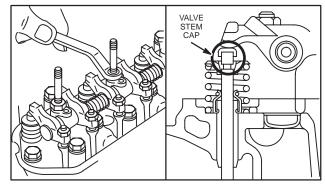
Remove Rocker Arm Assembly And Push Rods
